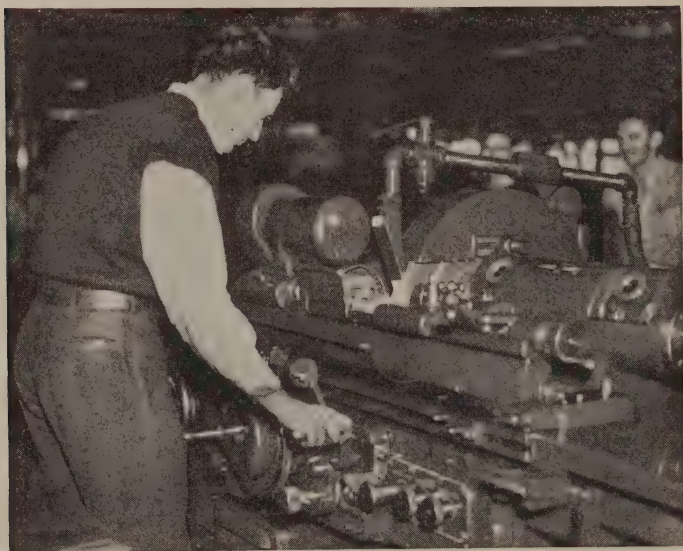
Plain grinding machine, with hydraulic table traverse and cross-feed mechanism. (Courtesy of Cincinnati Milling Machine and Cincinnati Grinders, Inc.)
